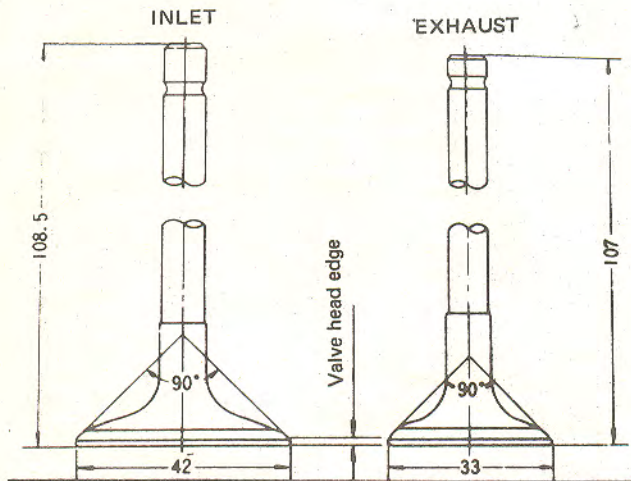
Dimensions of the valves. All dimensions are given in millimetres. See Section 1.4.1.0. for inch conversions.
